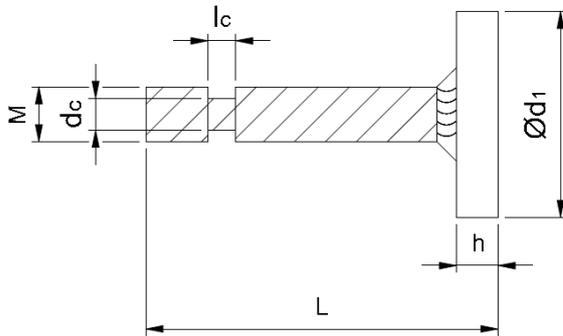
Standard design for compression bearing made of stainless round steel S690 or A4-80 or B500 NR, each with partial thread or full thread with welded-on anchor plate S235
